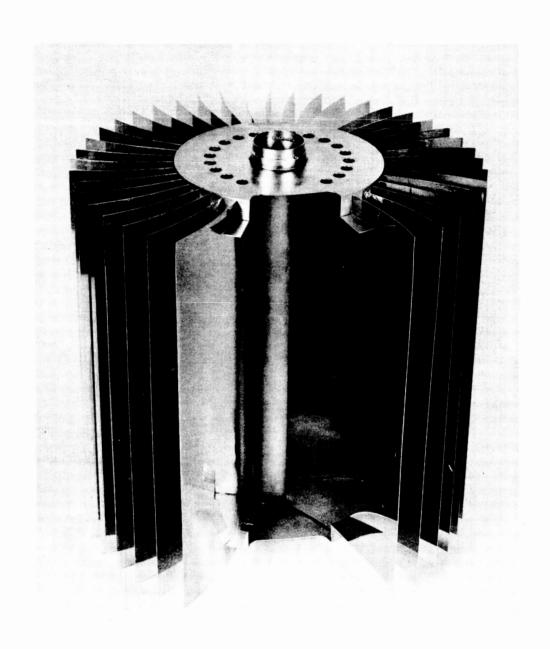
Photograph of Zirconium Gettering Assembly Installed in 100 KW Loop Dump Tank (C-64060312)
